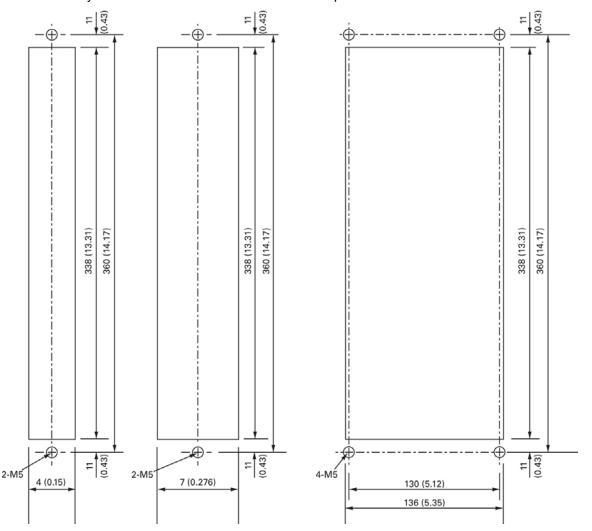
Panel Cut-out Drawings for Through-Cabinet Mounting of the α SVM1 Amplifiers
